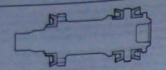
Secondary piston seal arrangement (Sec.7)
